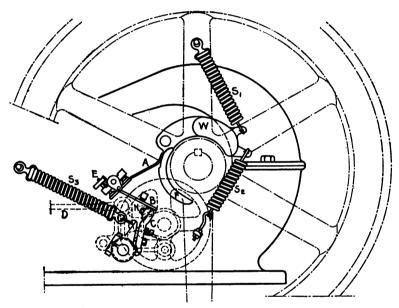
Centrifugal Mechanism for Hit-and-miss Governor. Seager Gas Engine Works.
